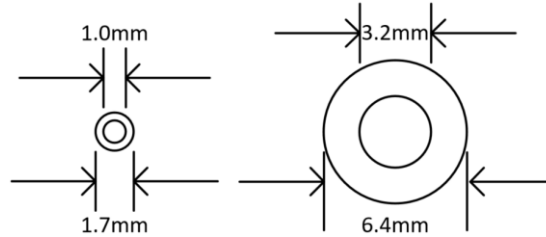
Dimensions of tie-point (left) and mounting hole (right).
